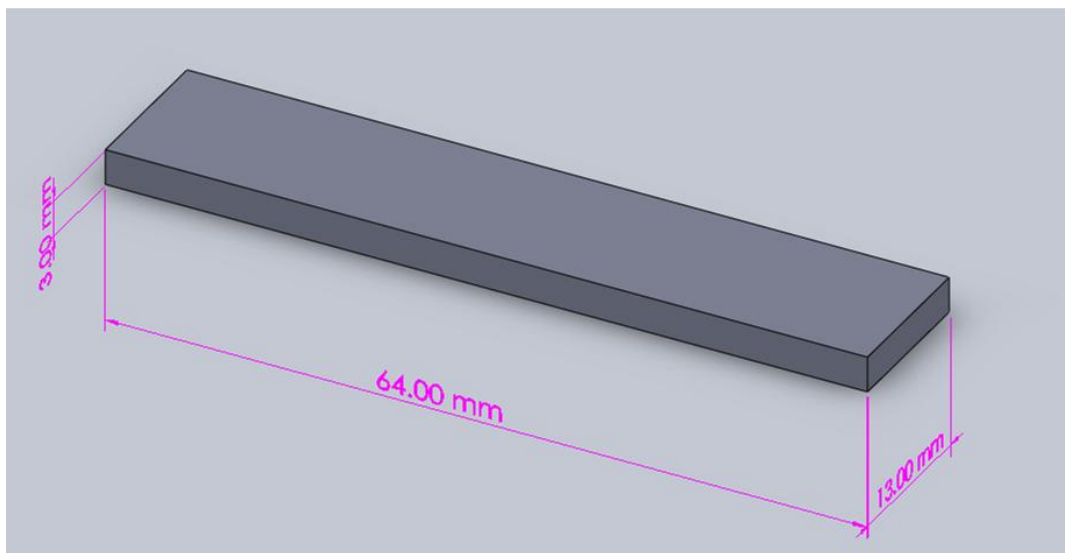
Isometric View of a Bending Test Sample Showing the Dimensions Used.
